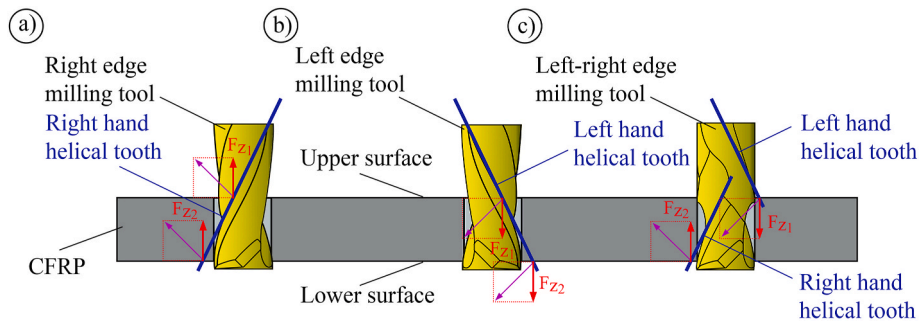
Effect of milling tool structure on the trimming of CFRPs: (a) the right edge (up cut) milling tool and (b) left edge (down cut) milling tool; (c) the left-right edge (dual helix or compression) milling tool, redrawn based on Ref. [210].
